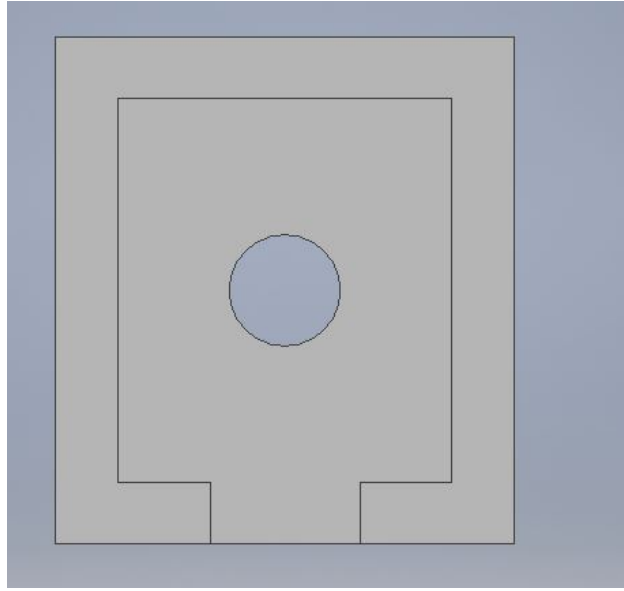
Bottom view of printed holder system's top section. This section will be placed over the bottom section. Copper creep tubes will stick out of the top section. An alligator clip is placed on the extended section to provide a grounded signal and keep the rod stable.
